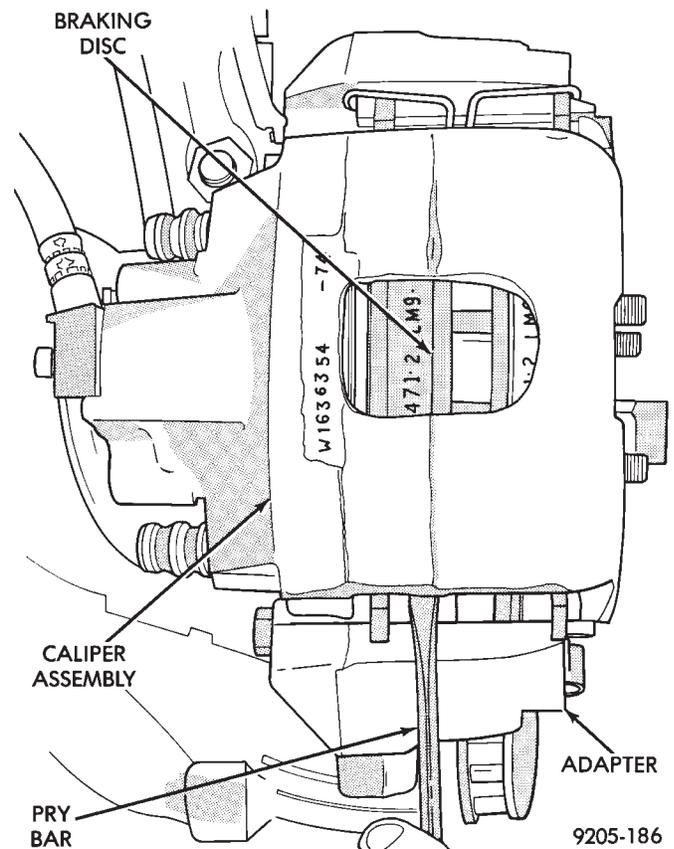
Loosening Family Caliper Assembly From Adapter And Rotor
